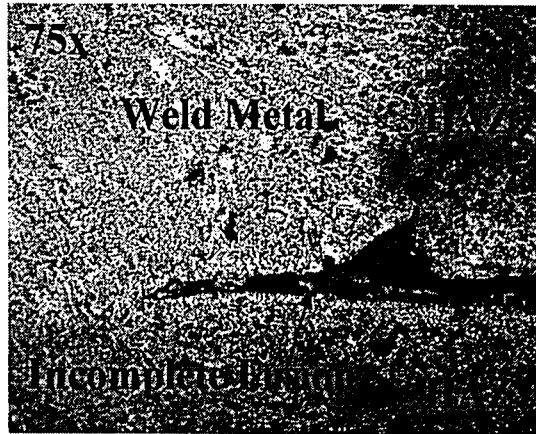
Incomplete Fusion in T-2 Weld-Section B
